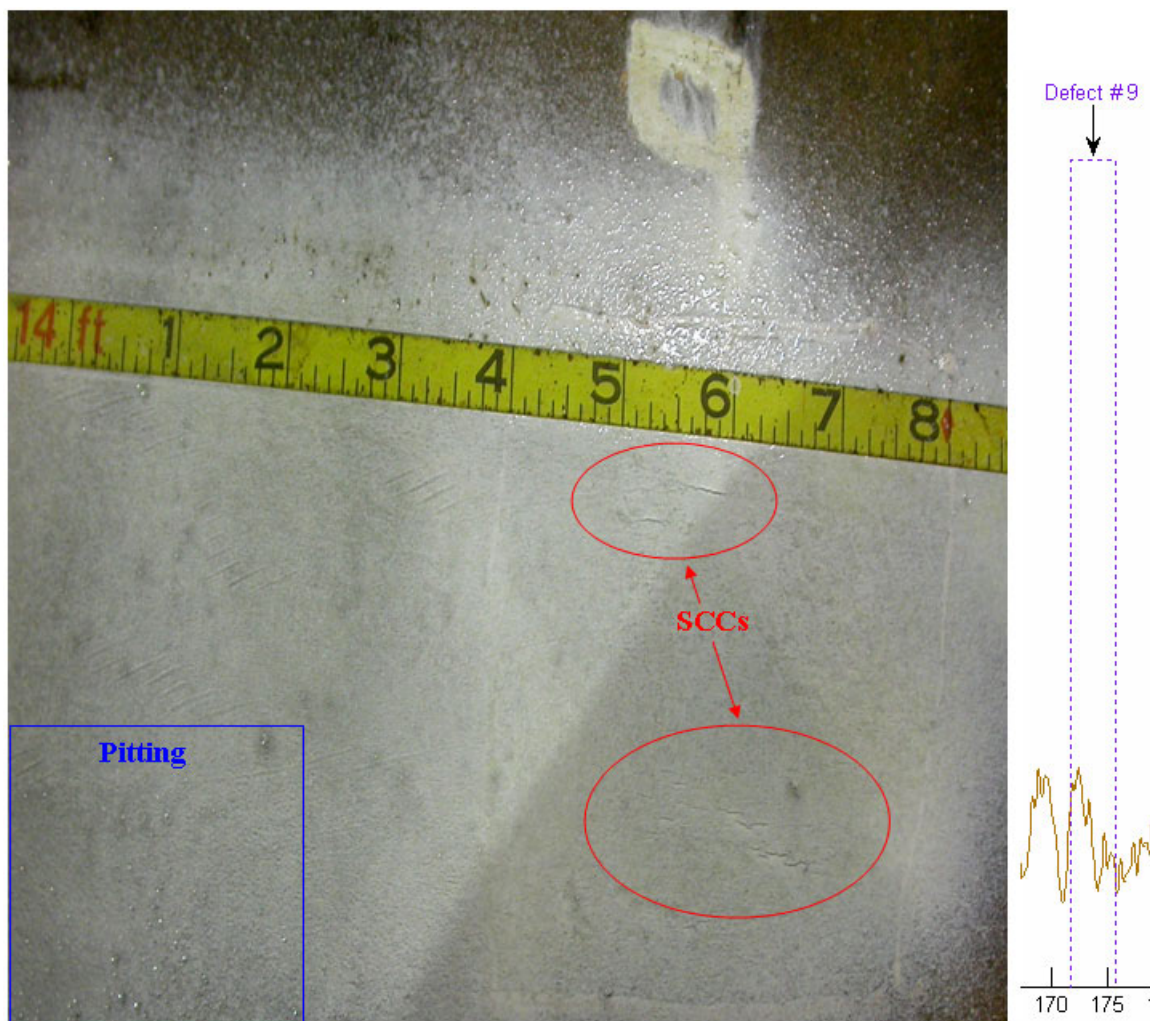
Indicator: Defect #9; Defect Type: SCCs and Pitting
